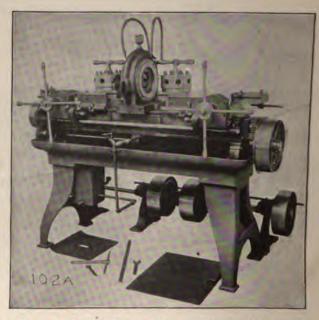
THE DOUBLE TURRET SCREW MACHINE.
